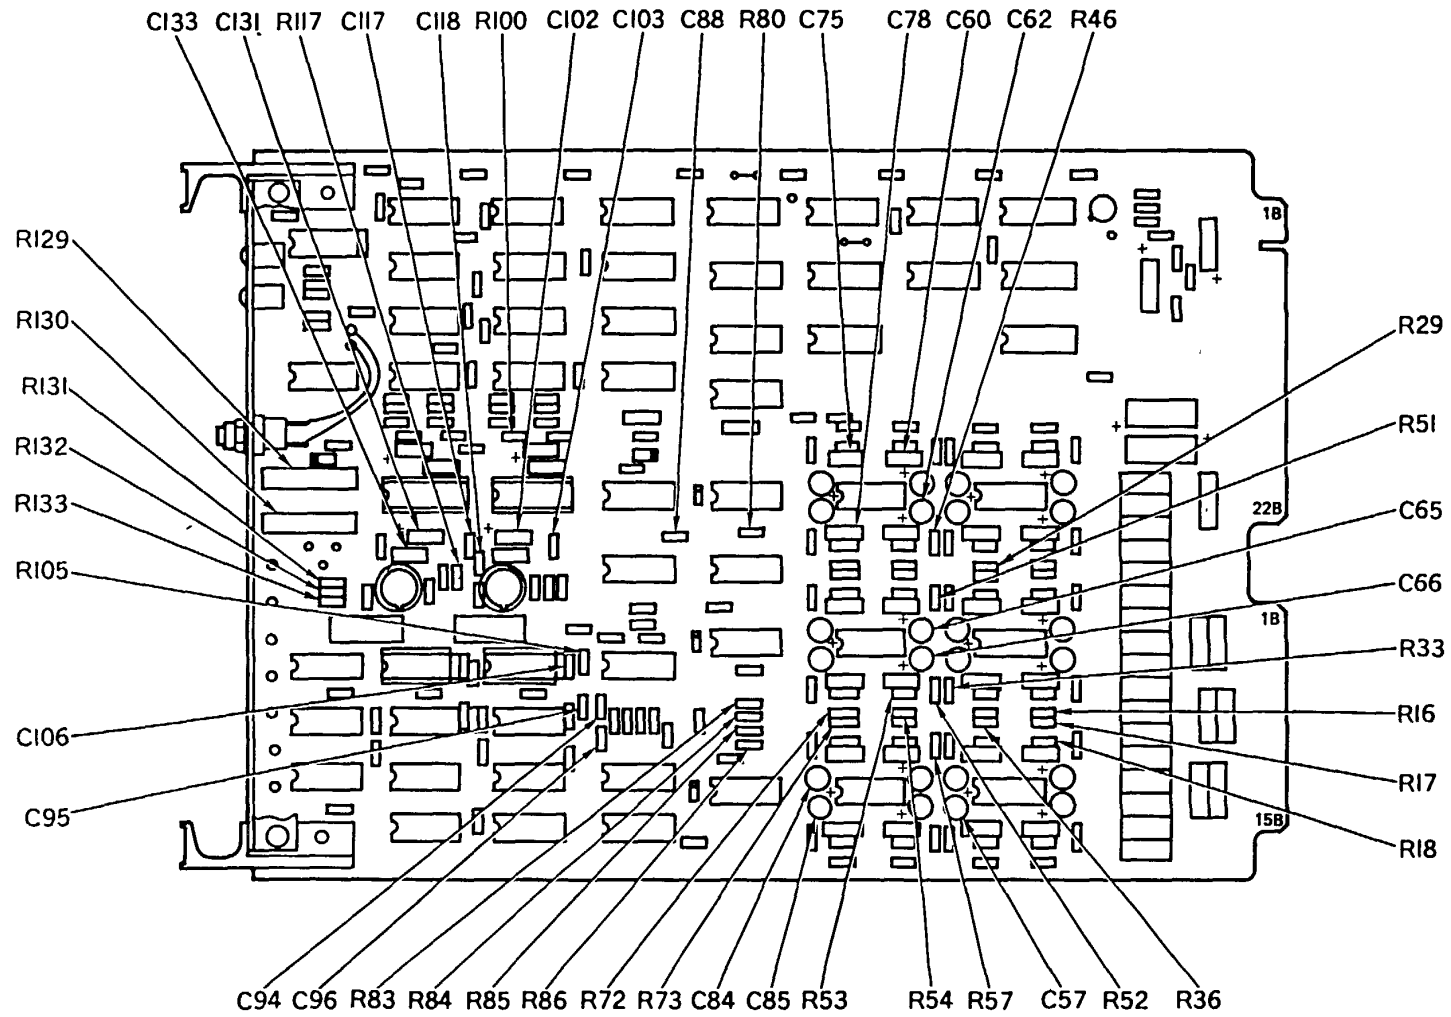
PCM unit parts location diagram (sheet 9 of 14) PCM06.
